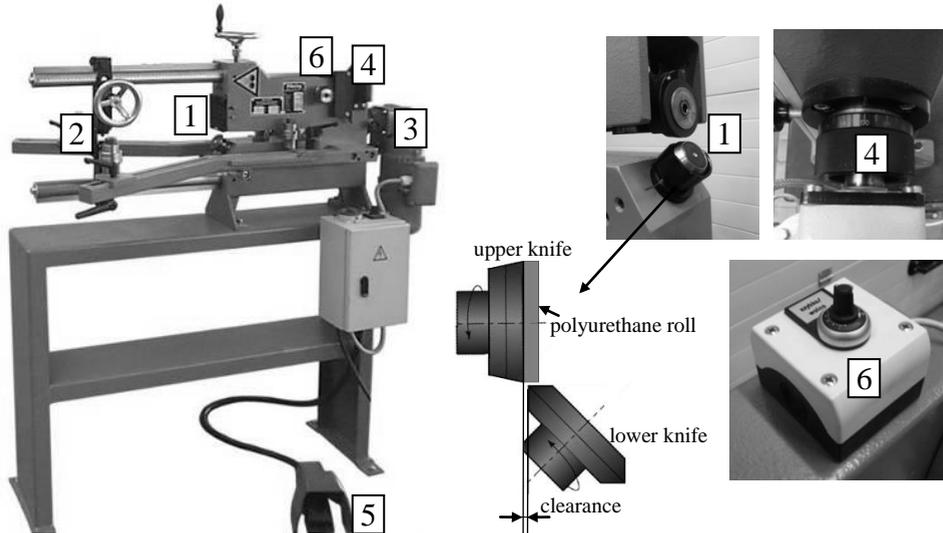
Schematic view of the slitting equipment: 1 – knives, 2 – sheet holder, 3 – engine, 4 – clearance regulator, 5 – drive pedal, 6 – slitting velocity regulator
